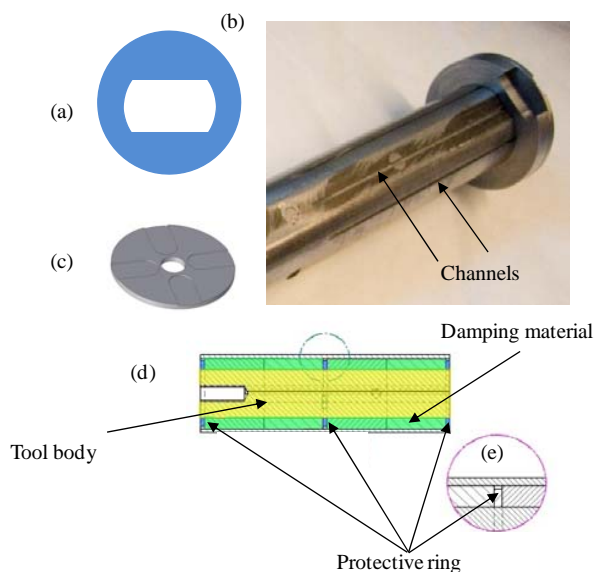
Mechanical components of the tool: (a) damping ring shape; (b) channels for the glue flow; (c) specially shaped ring for allowing the coolant flow through the tool; (d) section of the damping structure; (e) the protective discs are designed to not touch the external collet
